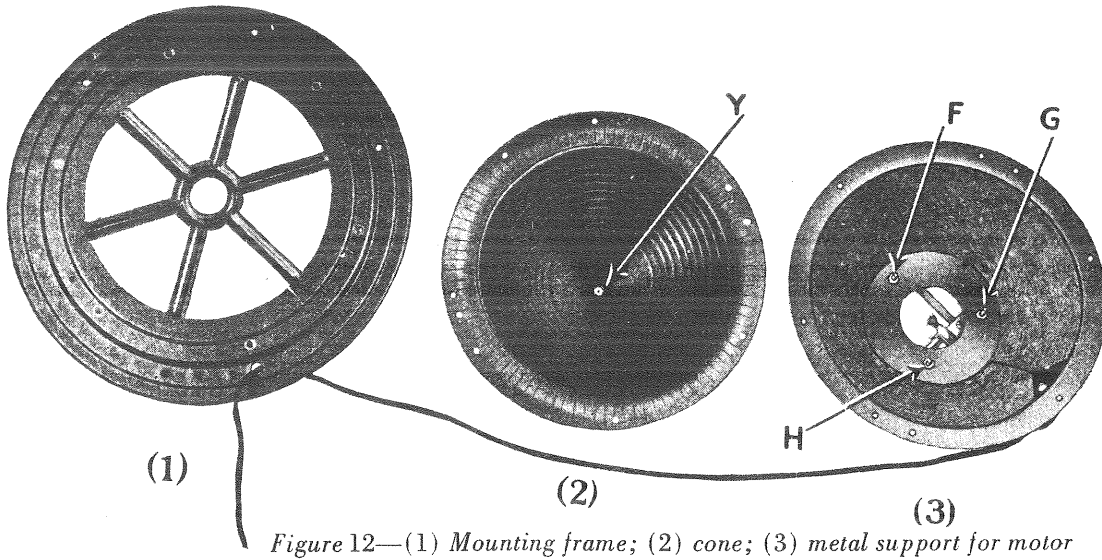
(1) Mounting frame; (2) cone; (3) metal support for motor
